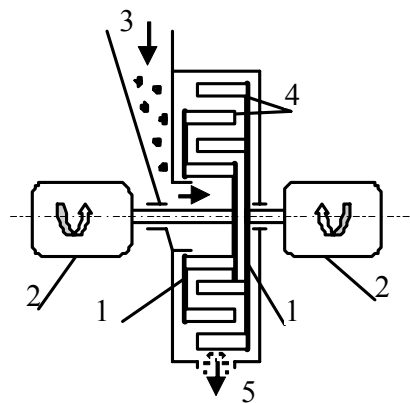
Schematic representation of the disintegrator equipment: 1 – rotors; 2 – electric drives; 3 – material supply; 4 – grinding elements; 5 – output
